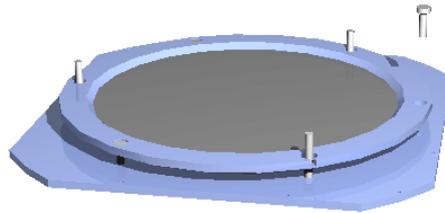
Assembly of MCP-stack - Stage 3-2 (DLD120 and HEX120)
